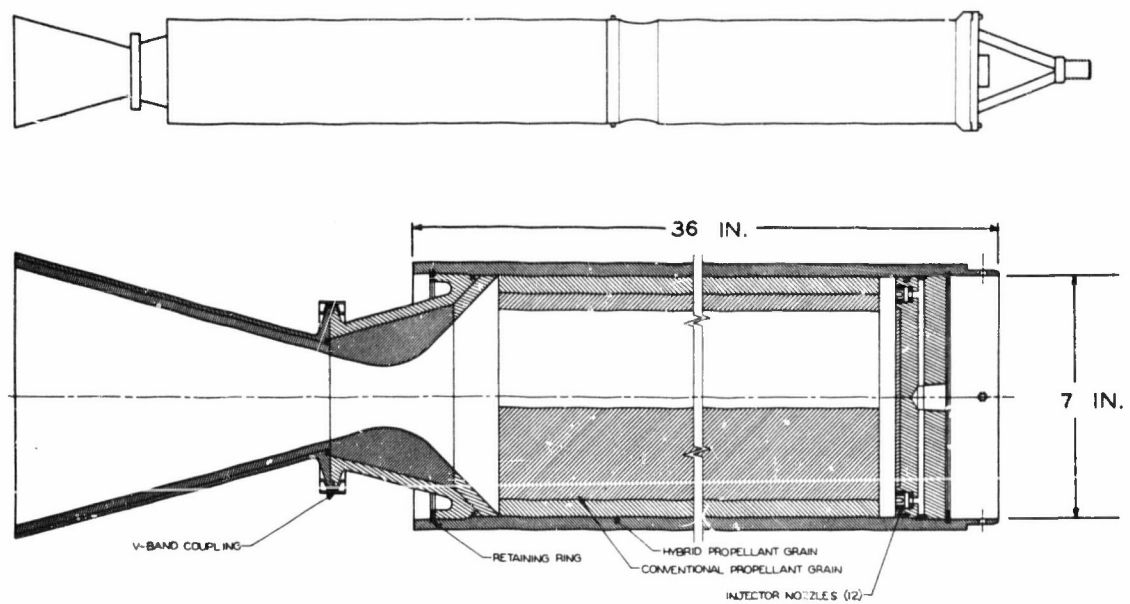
Hybrid motor case, injector plate, and nozzle assembly.
